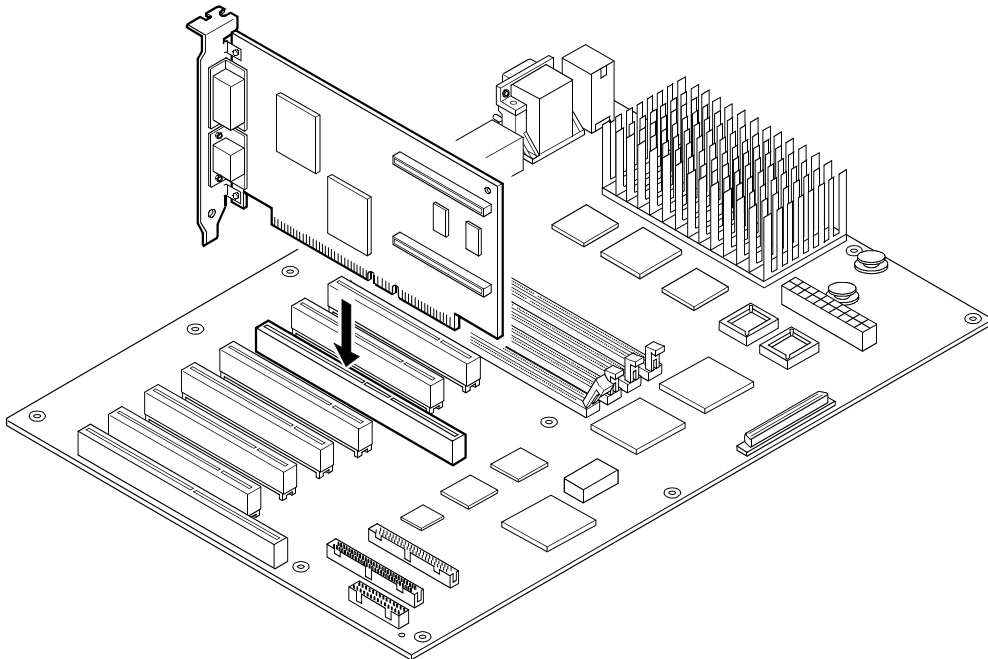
PCI Adapter Card Placement on MTX604-070
